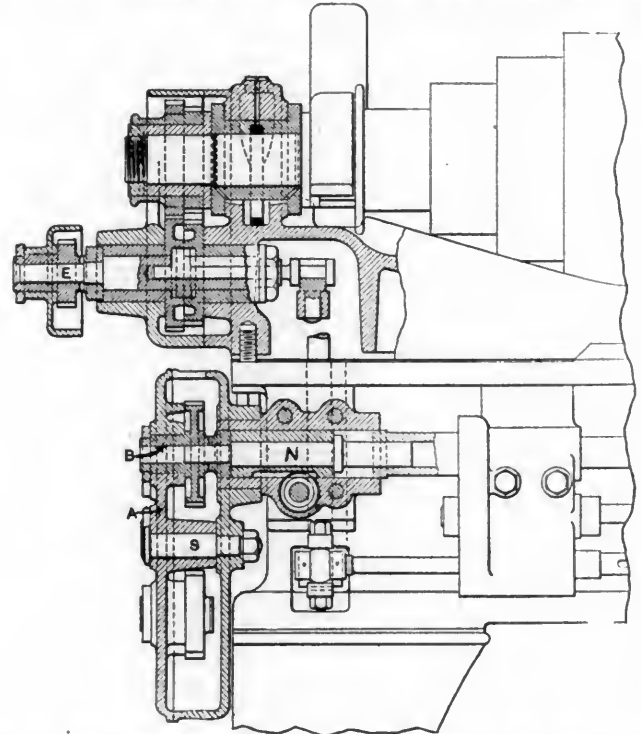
SECTIONAL VIEW OF IDEAL LATHE GEAR-BOX, SHOWING CLUTCH ARRANGEMENT.
